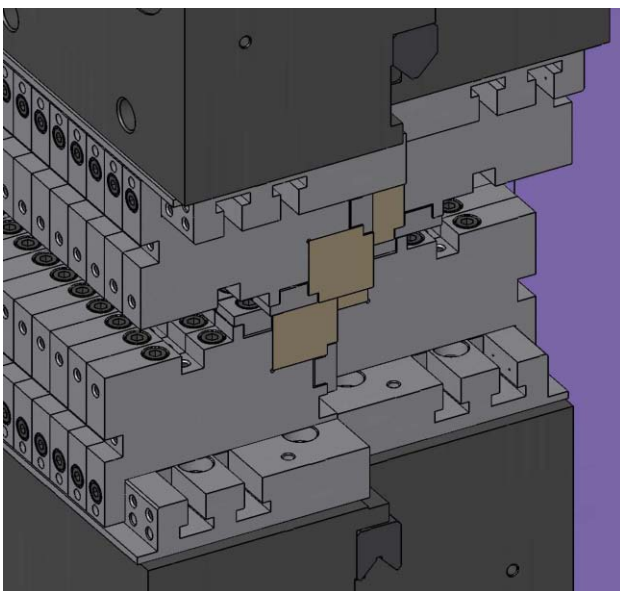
Undulator end-section showing the linear rails for the phase movement, magnets, holders and backing beams
